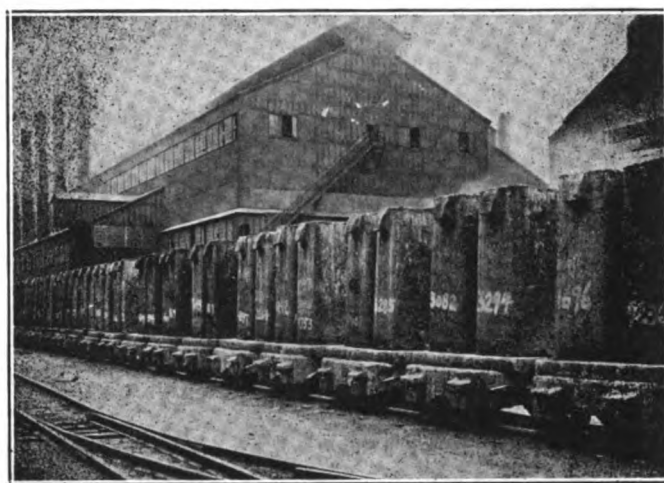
Ingot moulds and ingot mould cars. These cars are equipped with Hyatt Roller Bearings.
